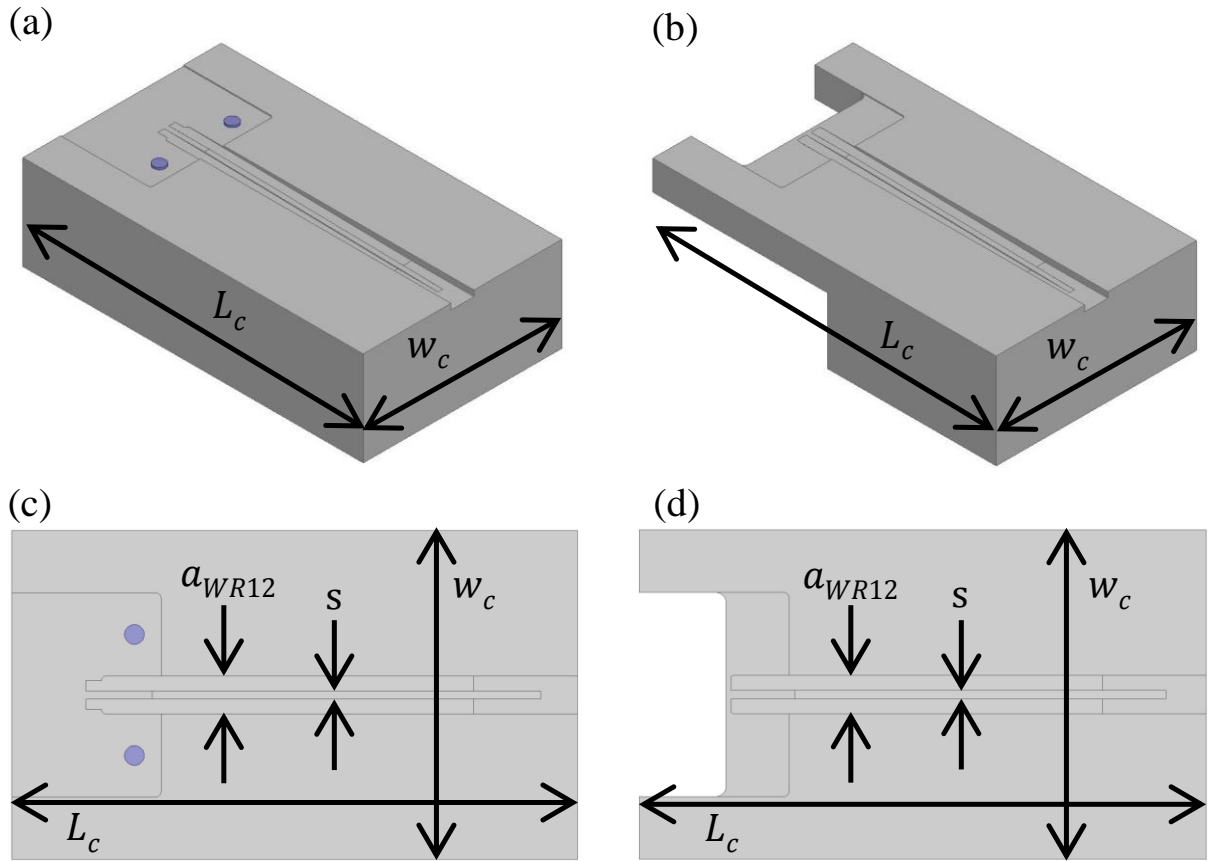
Different views of the proposed metal case made of top and bottom parts: (a) isometric view of bottom part, (b) isometric view of top part, (c) top view of bottom part, (d) top view of top part.
